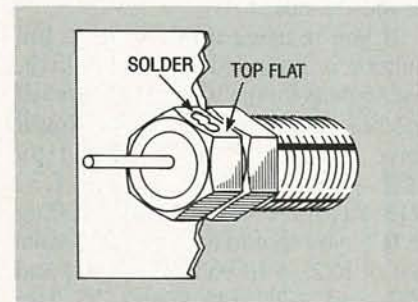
HERE'S A TIP FOR constructing a RFI shield. Before soldering the copper tape to the nut flats, tin the flats with a little solder first. The relay is on the underside of the PC board as viewed from this angle.
